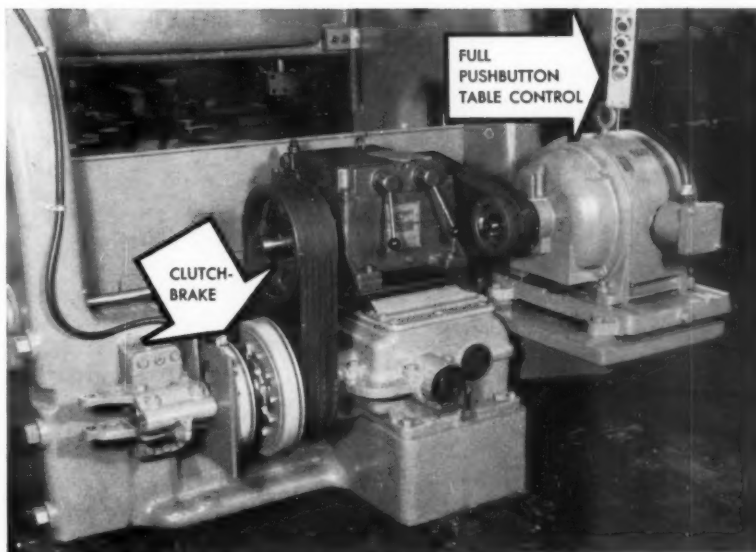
Replacing outdated wide belting and cone pulleys, this new table drive for a vertical boring machine features fast-acting electric clutch-brake with convenient pushbutton pendant control.
